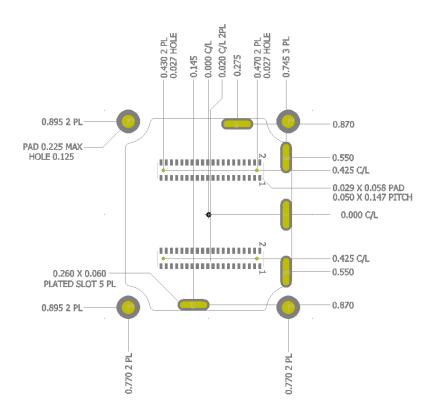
Single-Axis PCBA Footprint w/ Mating Connectors
